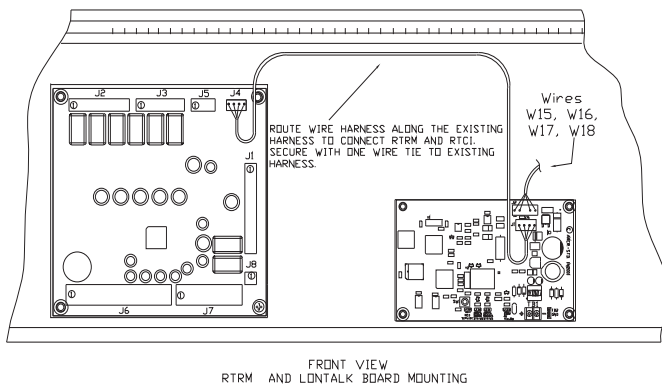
LonTalk® communication interface board mounting and wiring Y/THC092-120E and WSC120E units
